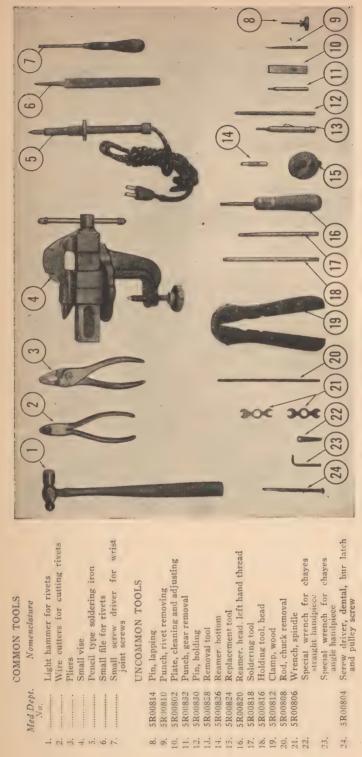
Tools for repair of engine, handpiece, straight, and engine, handpiece, angle.
